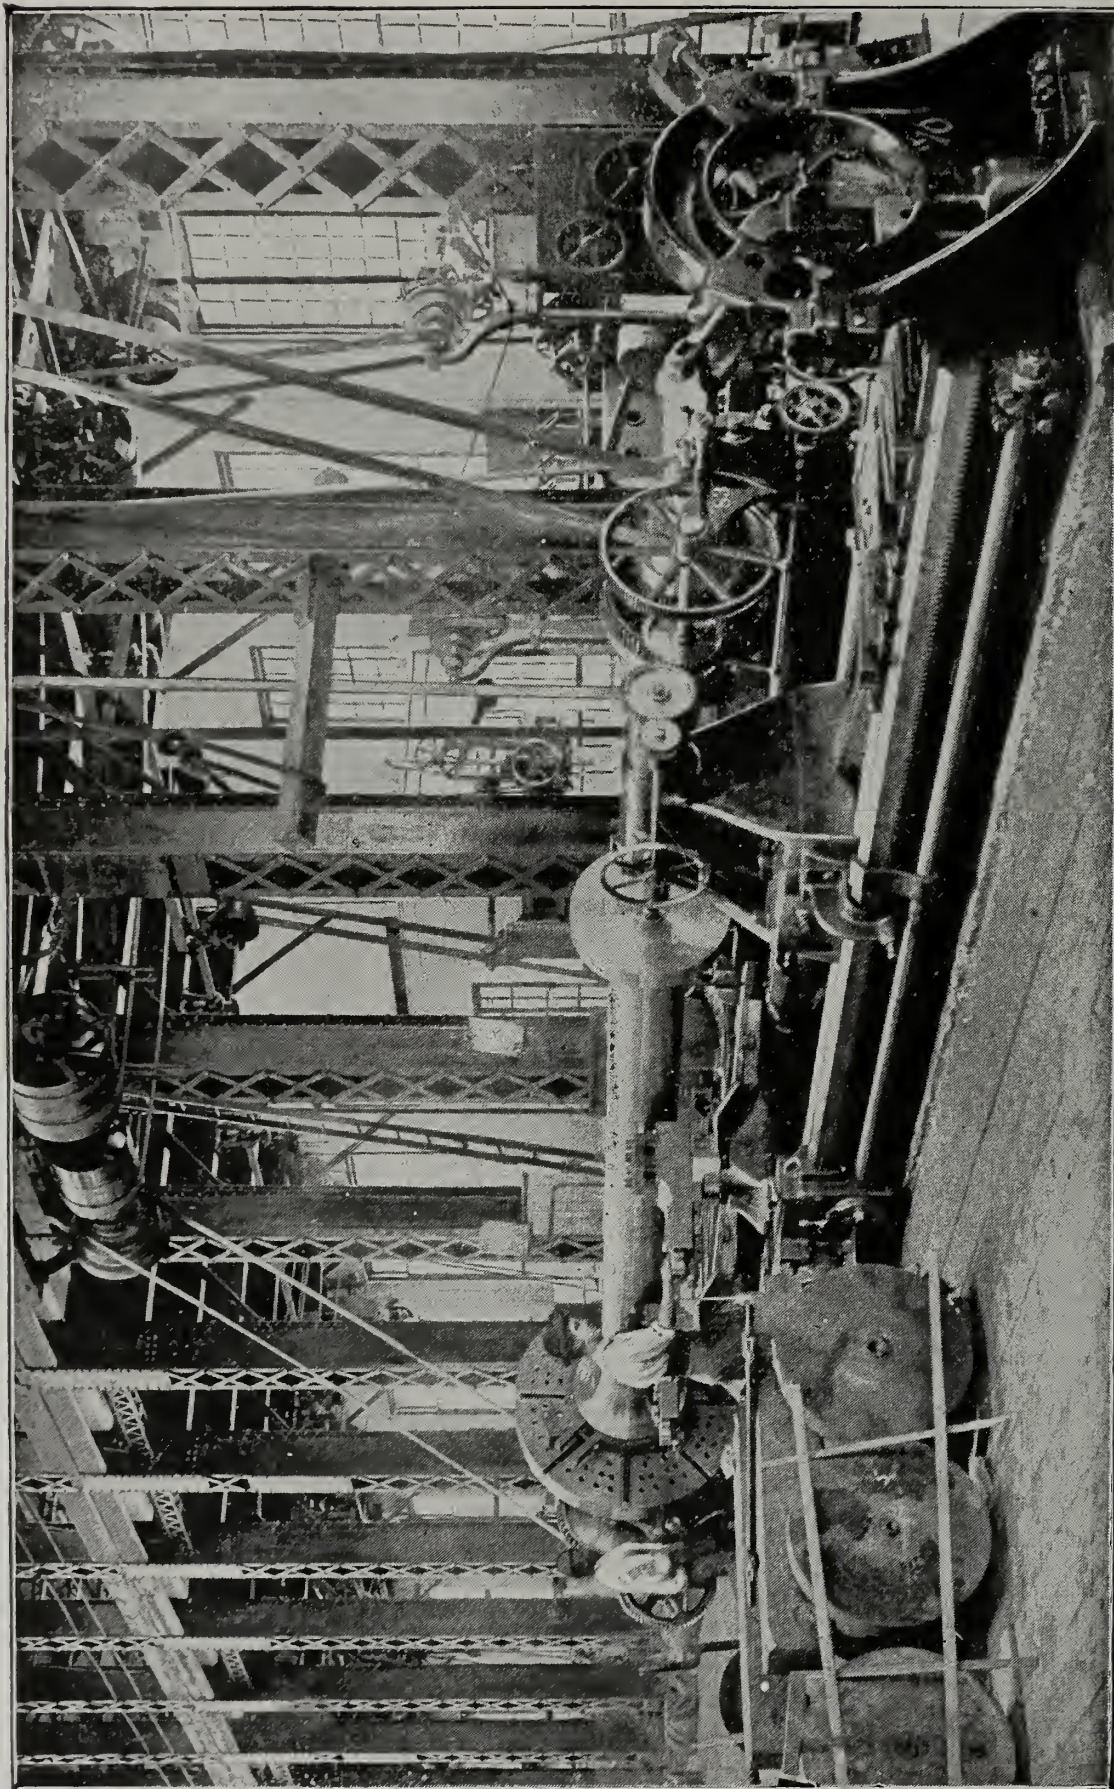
63-INCH SCREW-CUTTING LATHE, MANUFACTURED BY BEMENT, MILES & CO., PHILADELPHIA, PA.
